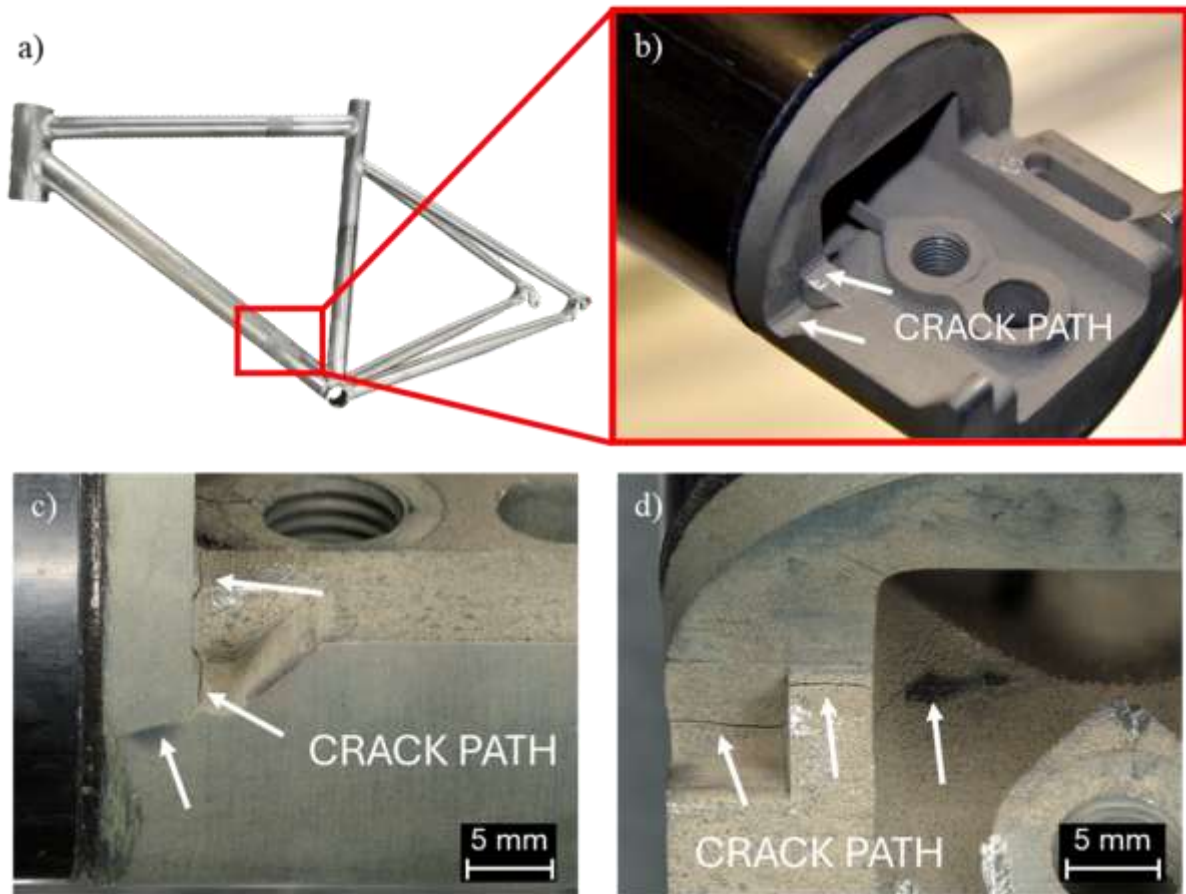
(a) Frame after fatigue test and (b) crack observed in the down-tube joint; (c) side view and (d) front view of the failed joint showing the crack path.
